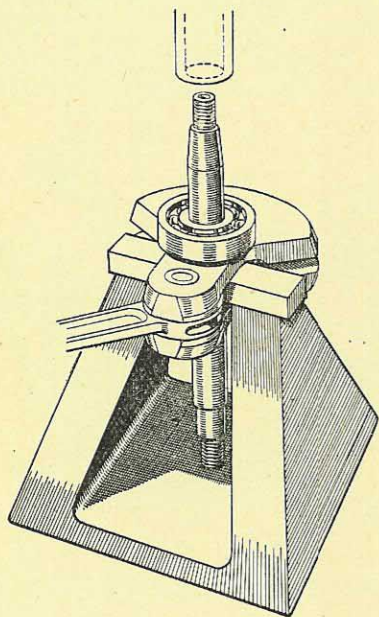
FIXTURE FOR FITTING BEARINGS.
